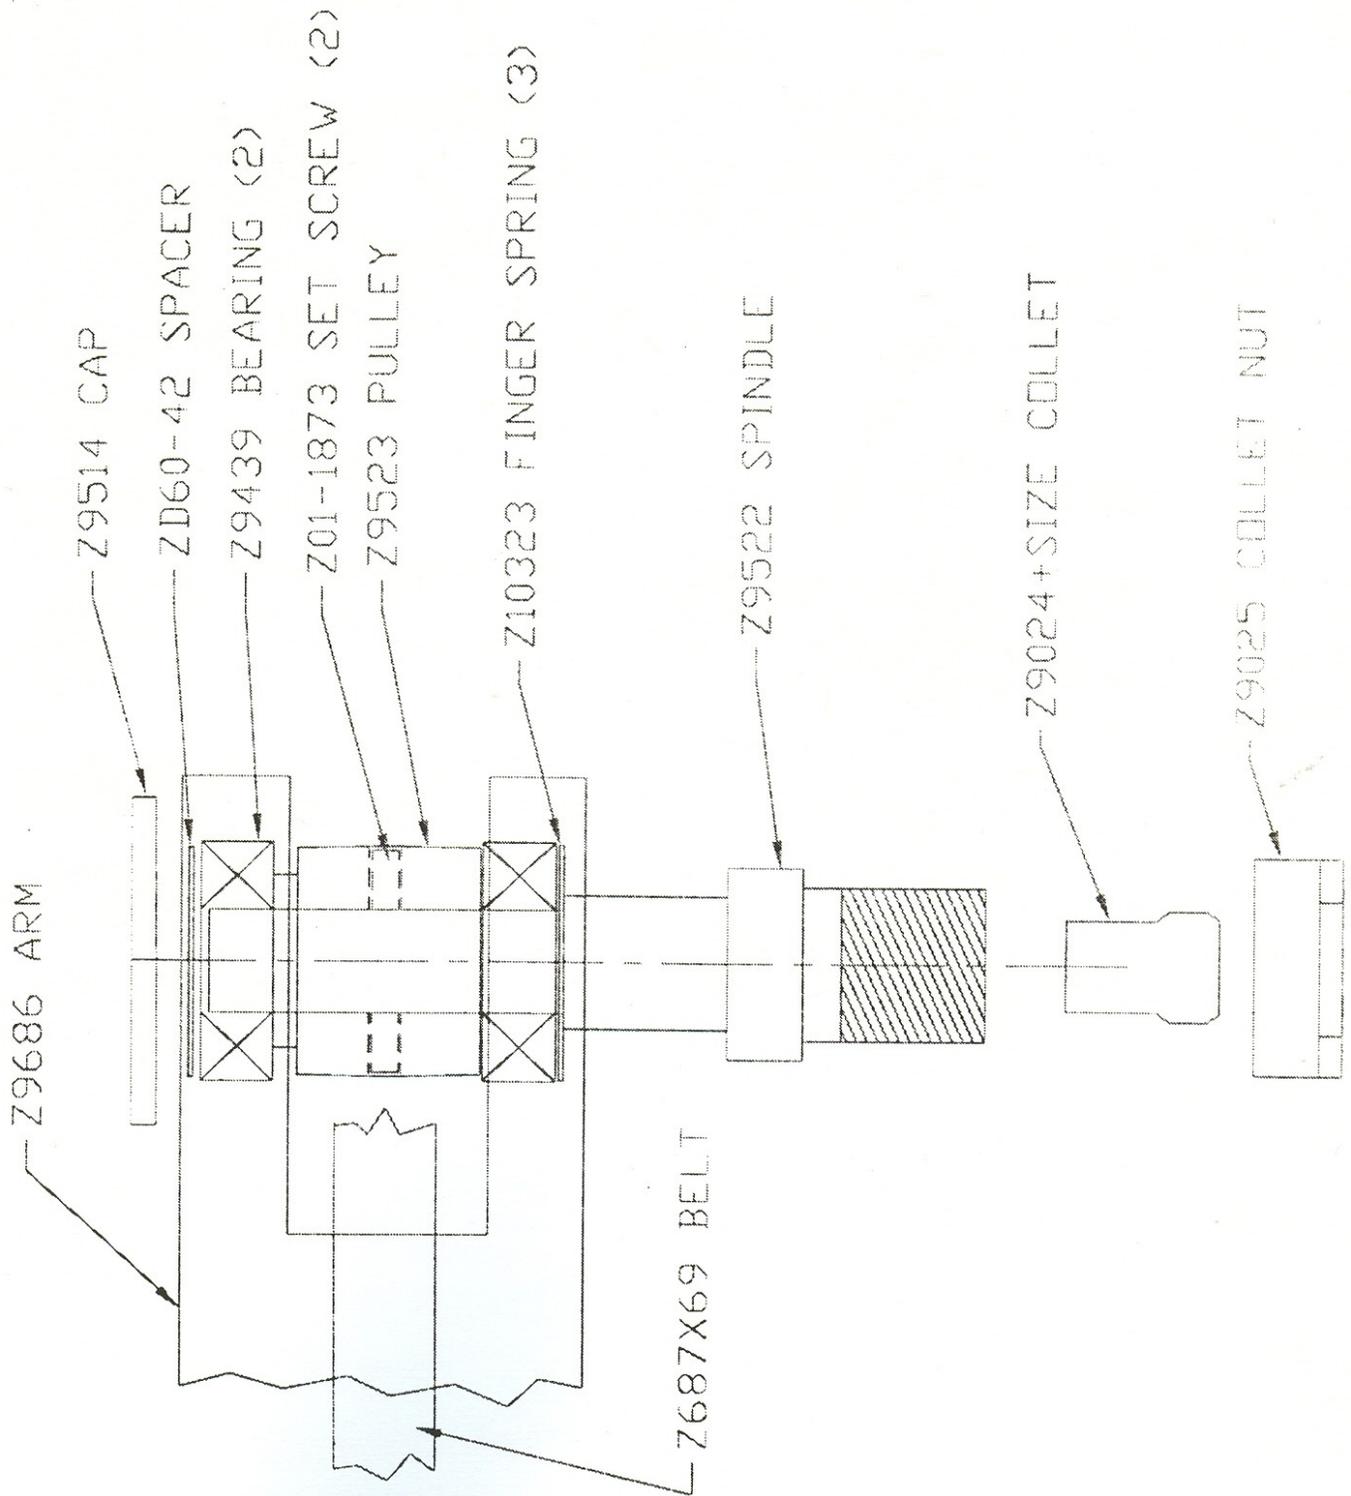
Collet Spindle Assembly for Northstar Models 10-1, 10-2, 20-1, 20-2 & 20-4
